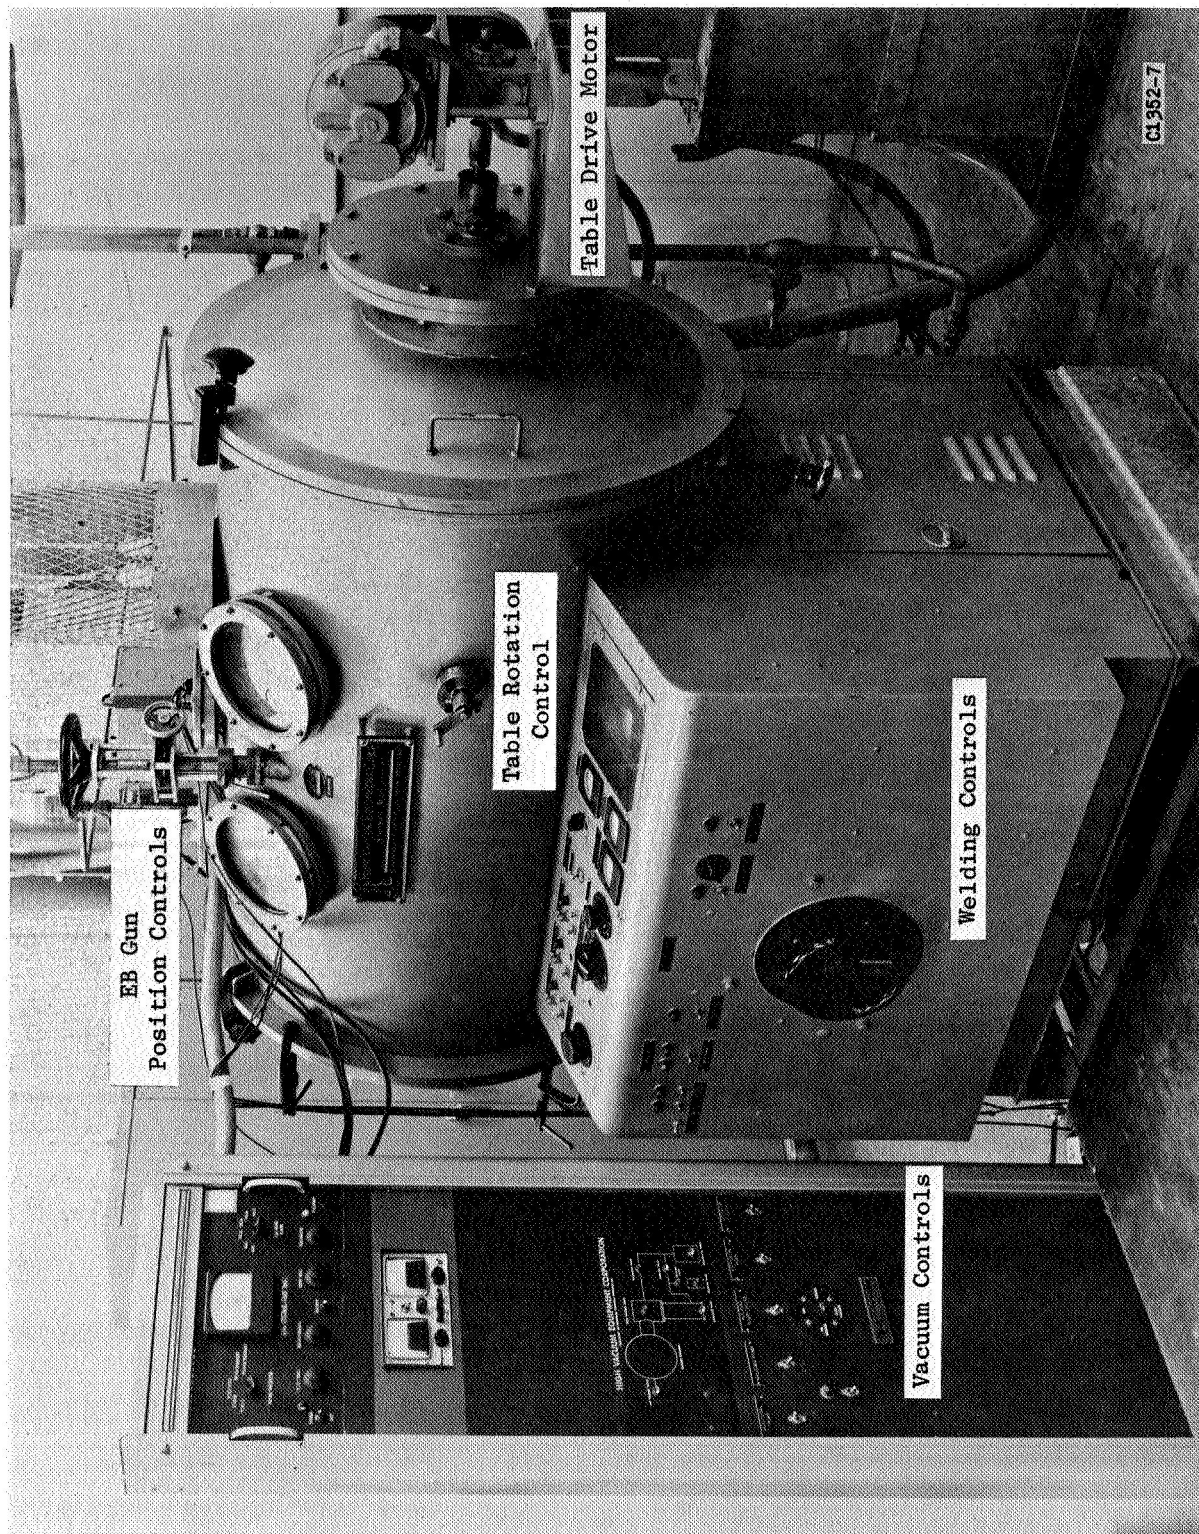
30KV Electron Beam Welding Chamber and Controls Used to Fill Corrosion Capsules with Alkali Metal. (C67040153)
